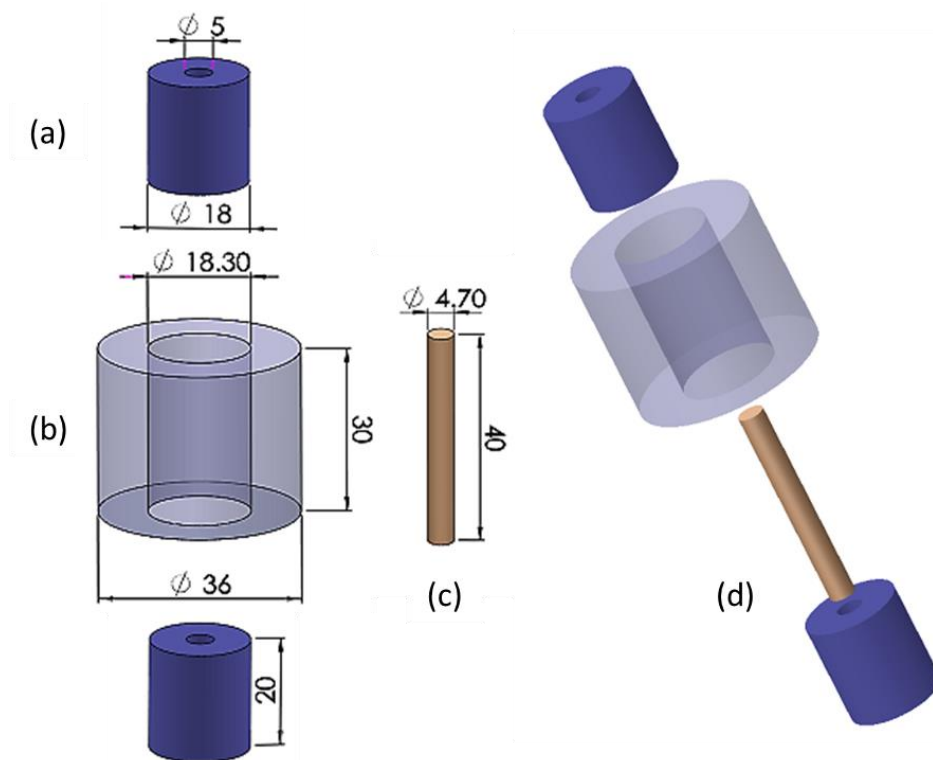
Tooling schematics for producing annular shape pellets: (a) Punch; (b) Die; (c) Mandrel; (d) Isometric view. Tooling dimensions are also presented (unit: mm).
